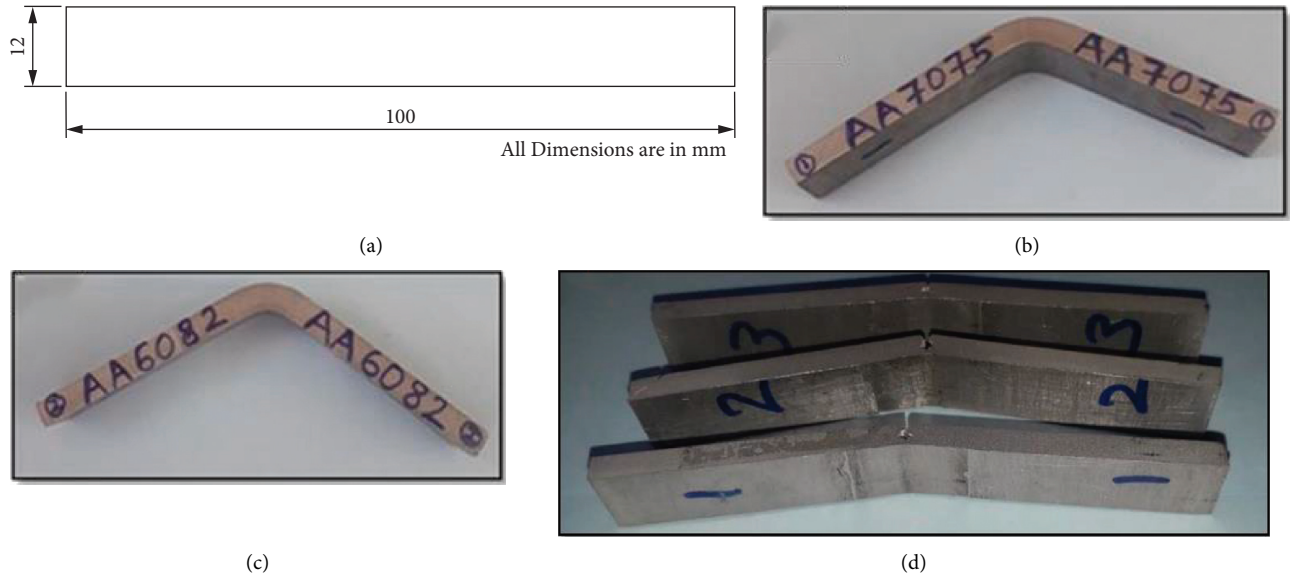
(a) Top view of bend sample as per the ASTM standard. (b, c) Photographic view of base material bend samples. (d) Photographic view of bend samples after the experiment.
